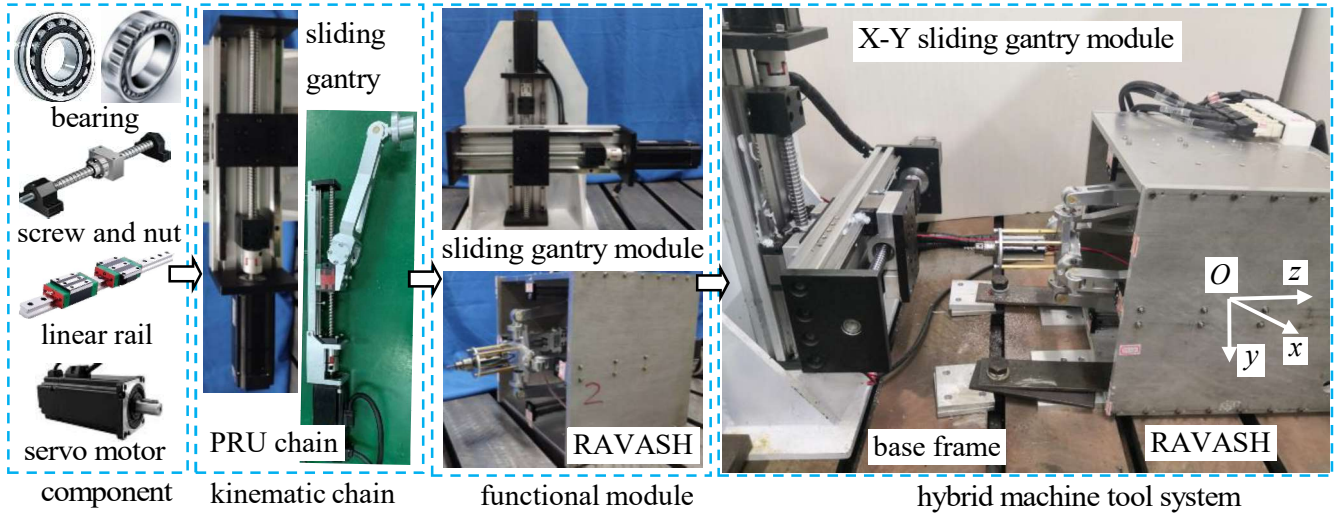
Hierarchical fabrication of the proposed 5-axis hybrid machine tool
